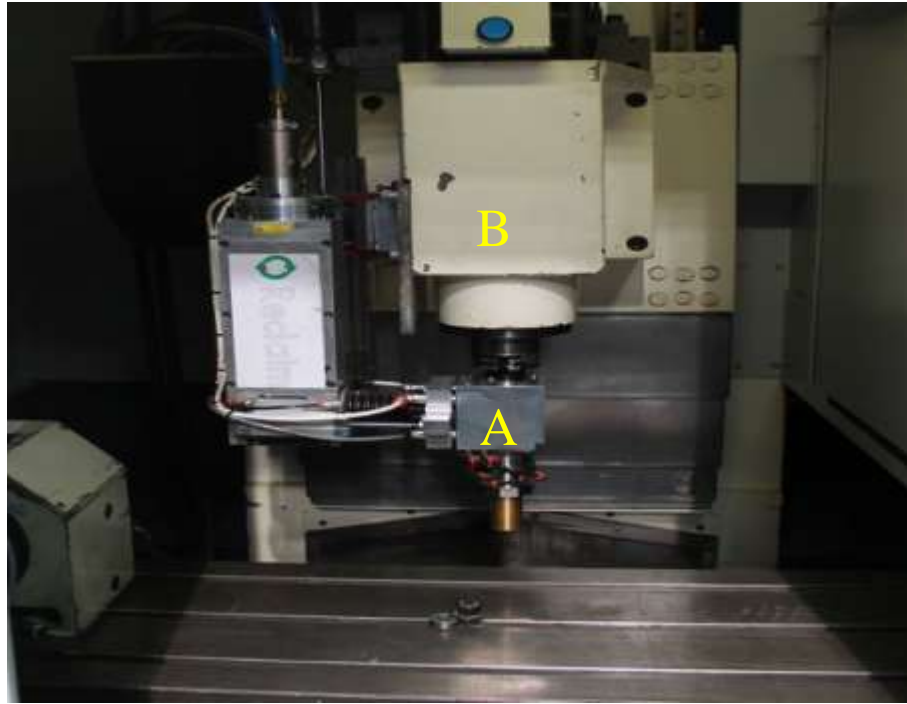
Showing the laser cladding head (A) loaded in CNC chunk (B).
